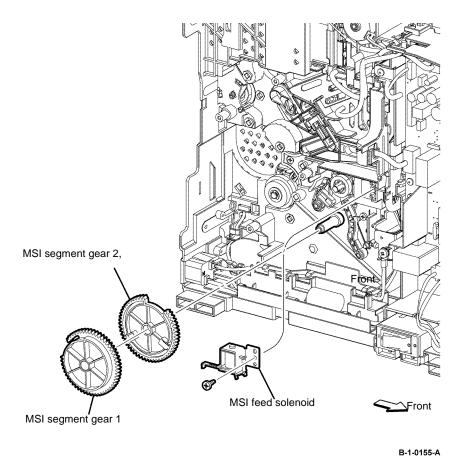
MSI feed solenoid, segment and MSI feed gears removal
